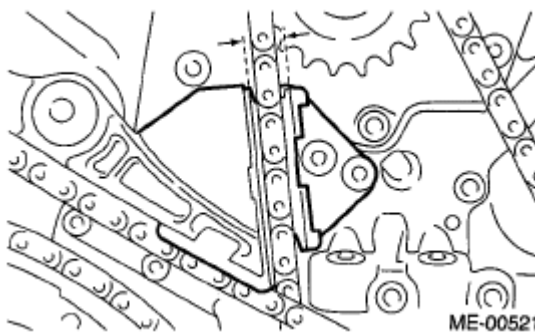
Adjusting Clearance Between Chain Guide And Chain Guide
